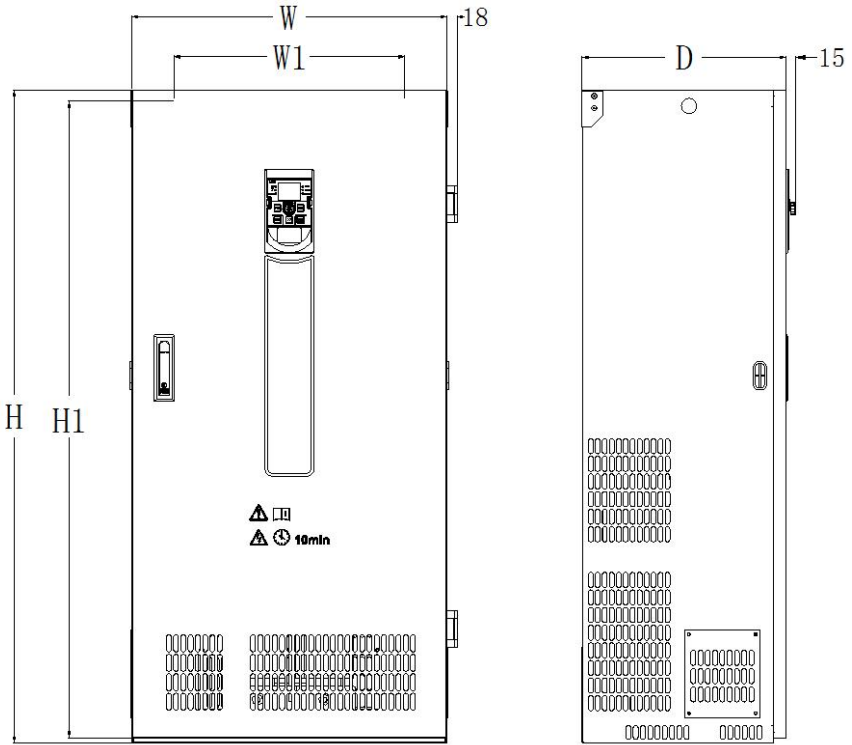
External/Mounting dimensions of inverter for 380V 220kW or more
